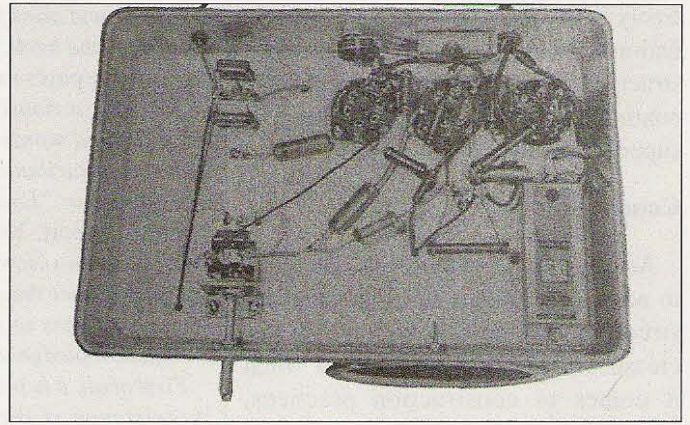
Photo L. Aluminum bread pan or cake tin. The rolled edge is safe to handle during construction. In addition, the rolled edge and tapered sides provide rigid support for the project. Photo ref. 5, pg. 18.
